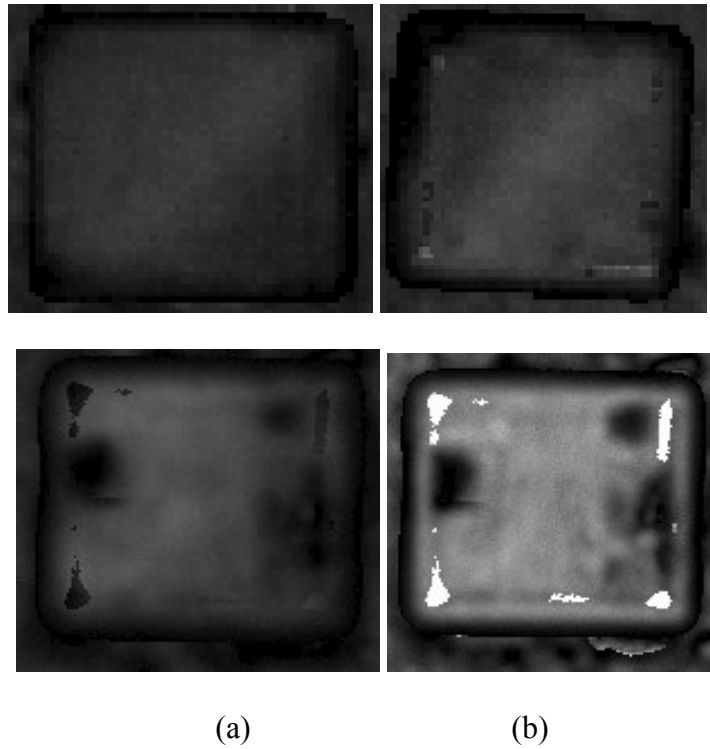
The SAM images of the solder joints after (a) 0 cycle (b) 343 cycles (photo by author)
